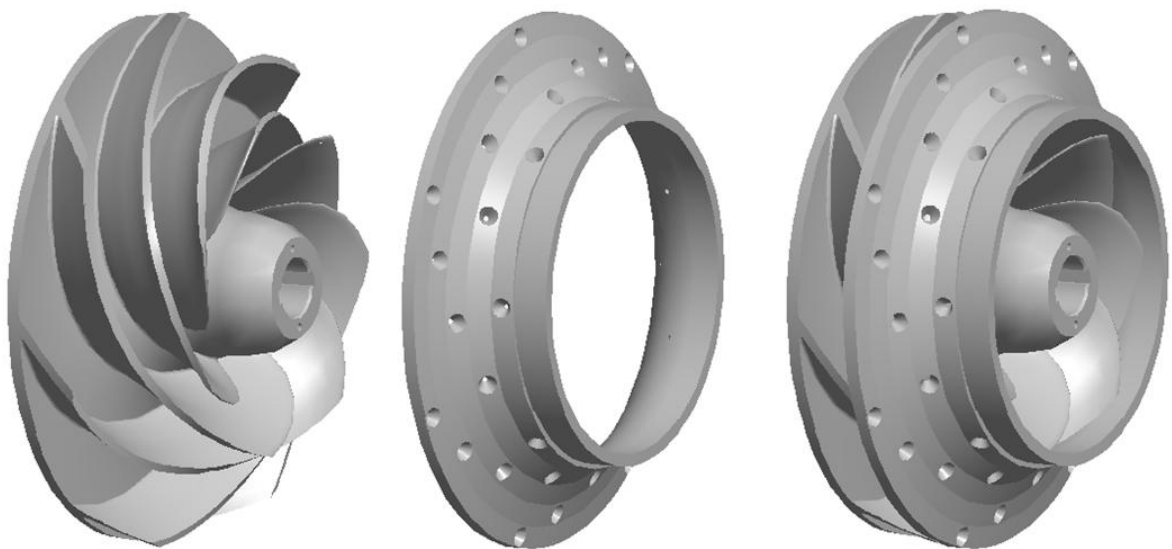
Left: wear disk with blades, middle: cover disk, right: assembled impeller
